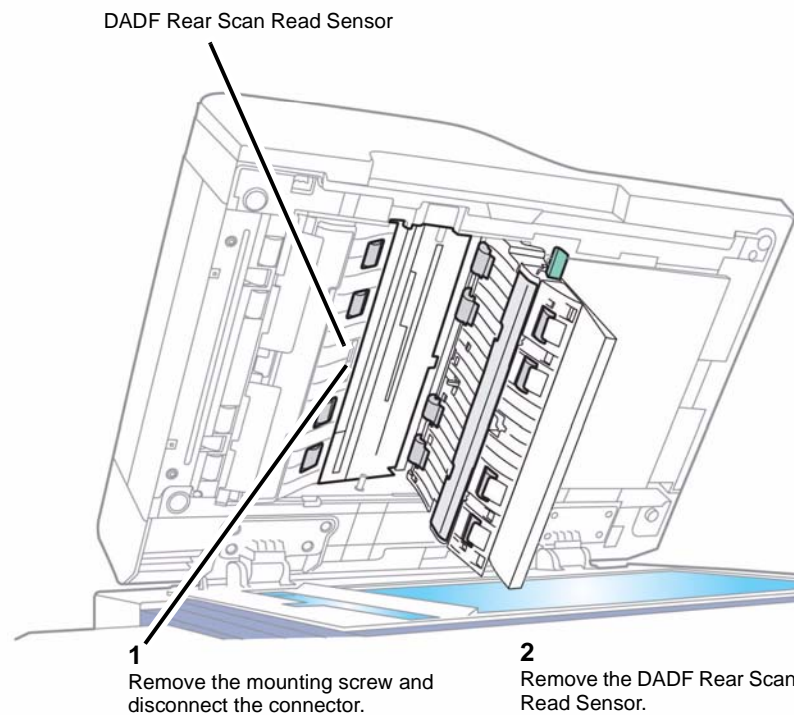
Locating and Removing the DADF Rear Scan Read Sensor
